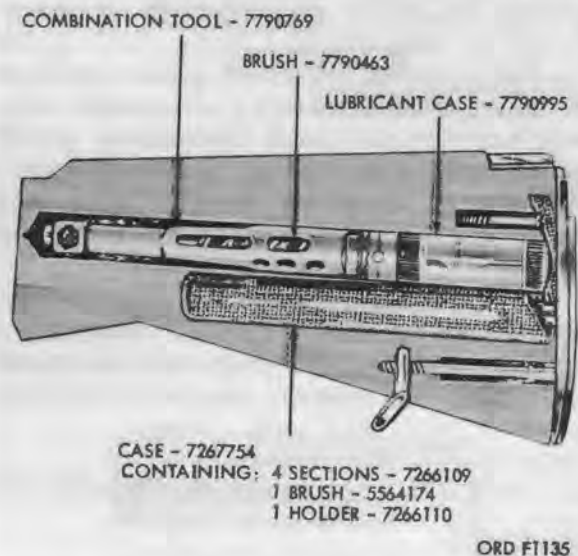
Tools and equipment stowed in stock with butt plate assembly 7790702.
